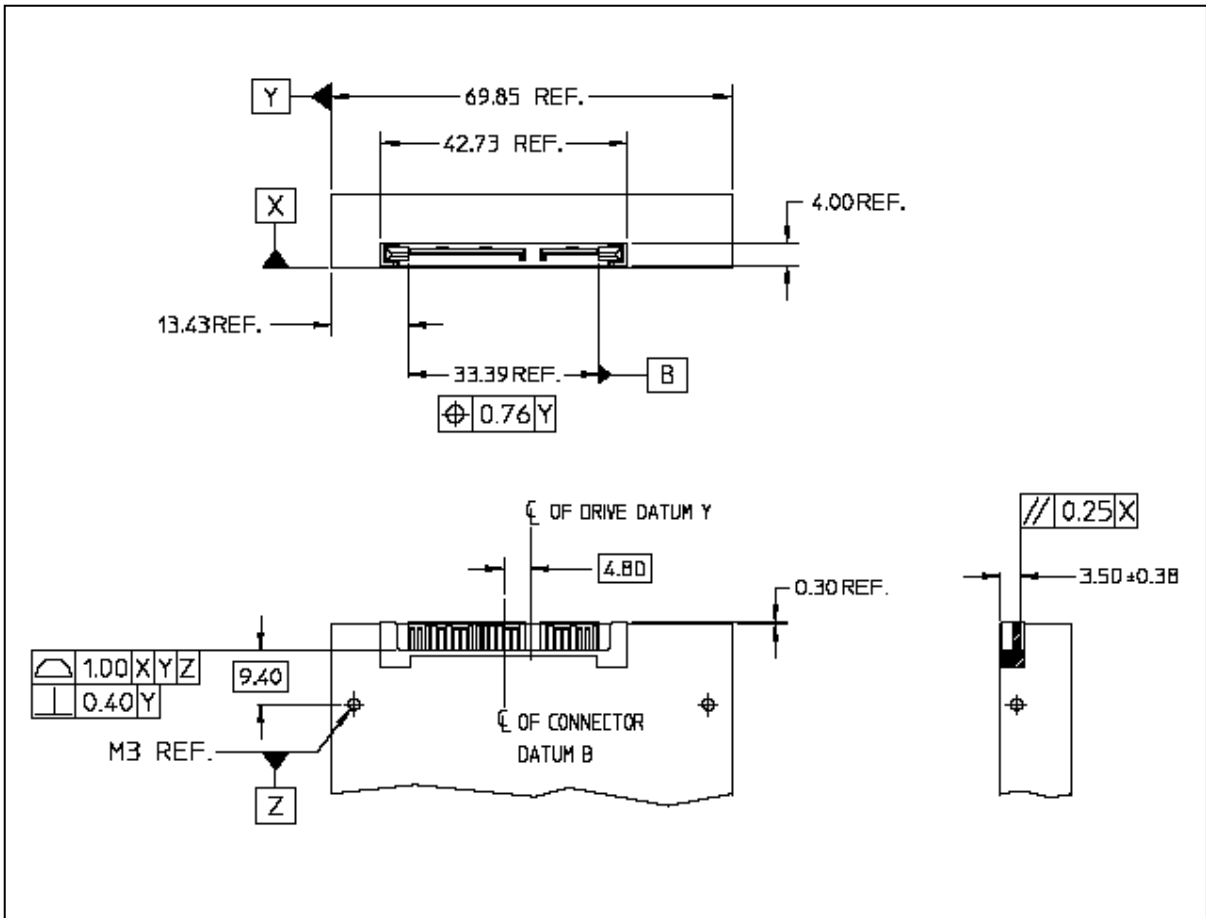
Device Plug Connector Location on 2.5" Bottom Mounted Device
